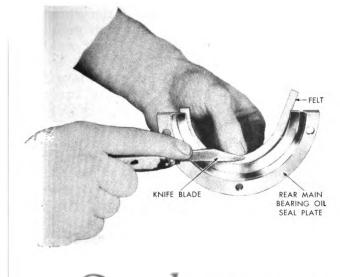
Inserting Rear Bearing Cil Seal Felt.
